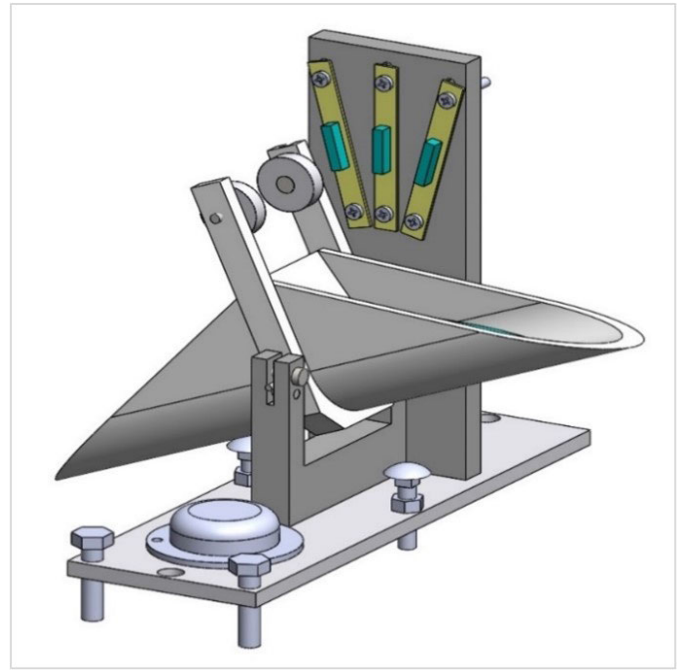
Tilting bucket assembly in ETG rain gauge.
